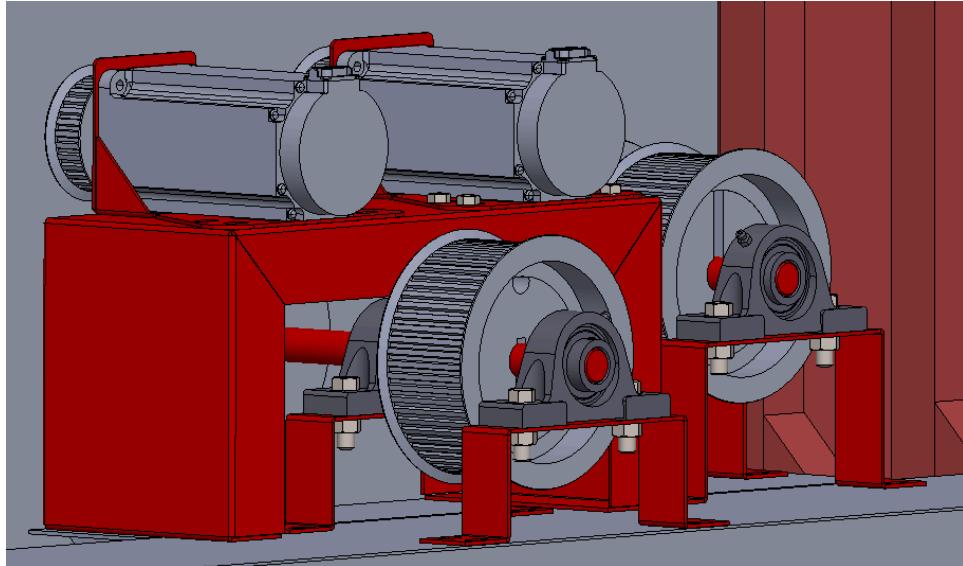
(b): Detailed view of the Motor mounts and X-Axis assembly
